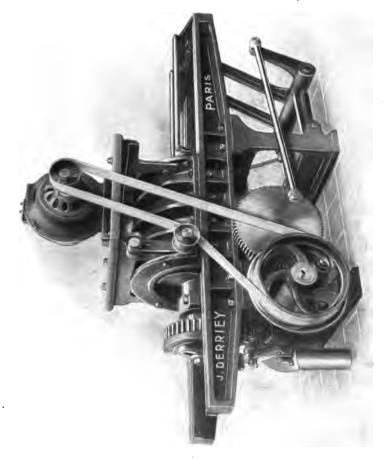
Automatic boring machine for semicylindrical plates. [To face plate XCIII.
